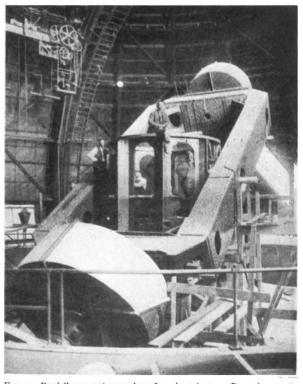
Partially erected mounting of 100-in. telescope, December, 1916. (The cutting of the teeth of the large worm gear has since been completed.)
